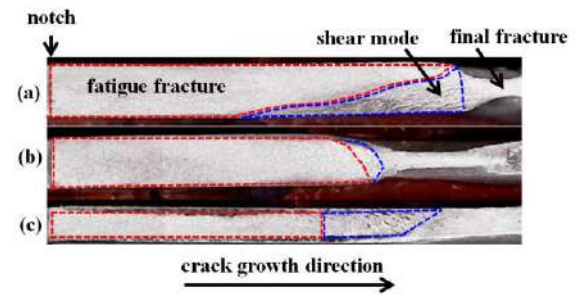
Fractured surfaces of AA 5052 aluminum alloy: (a) As-received, (b) CR-15%, (c). CR-45%
